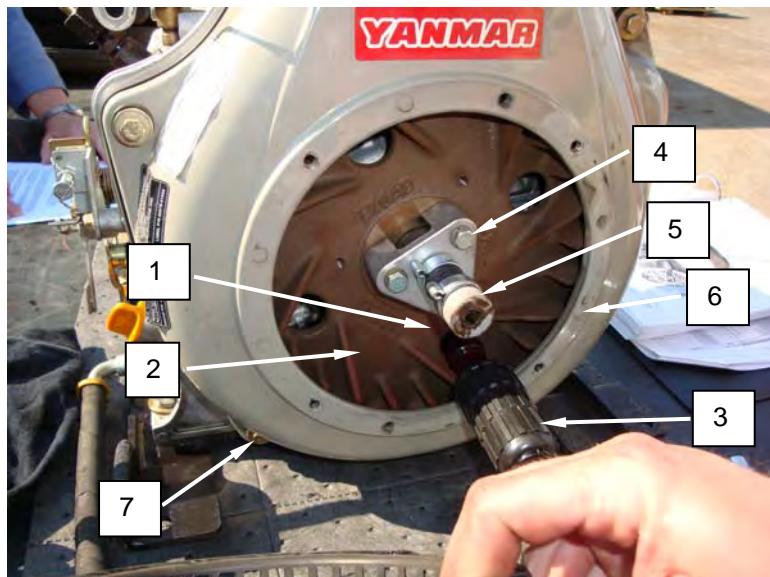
Install the Flywheel Housing and Burner Fuel Pump Coupling.
